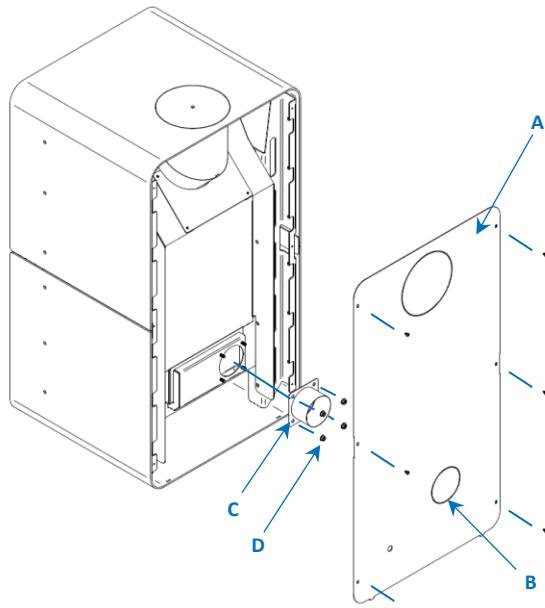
Section to be eliminated (B) for placing the external air inlet (C)
